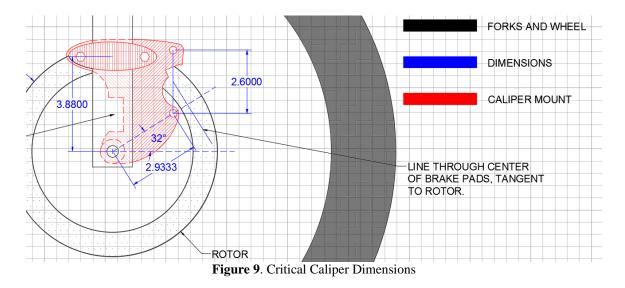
shows a detailed view of the caliper drawing with critical dimensions.
